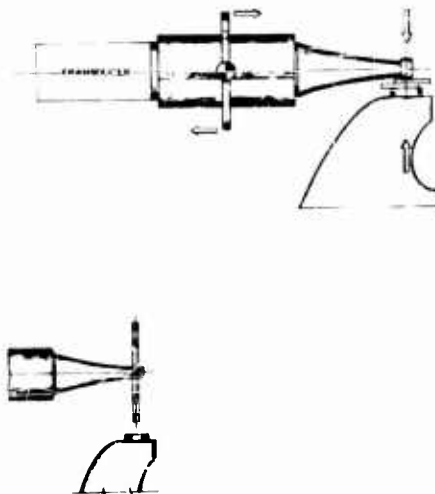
SCHEMATIC OF LATERAL-DRIVE WELDING SYSTEM
